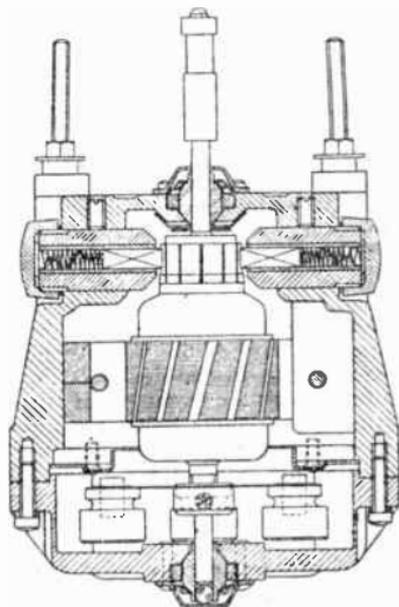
(right).—SECTIONAL VIEW OF A UNIVERSAL MOTOR FOR USE WITH GRAMOPHONE UNITS.
